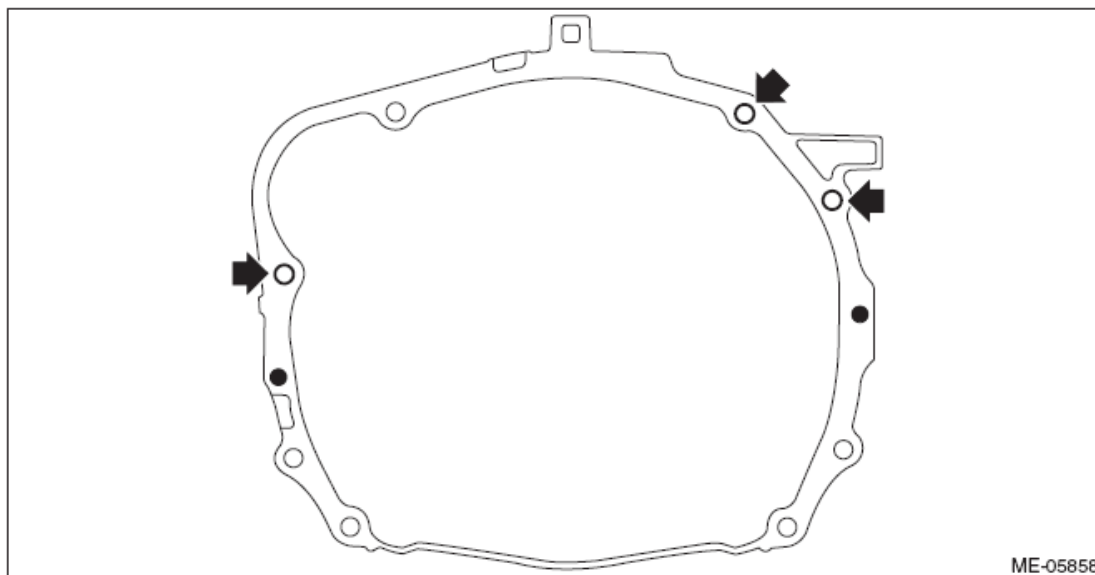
Locating Transmission To Engine Upper Side Bolts (CVT Model)
